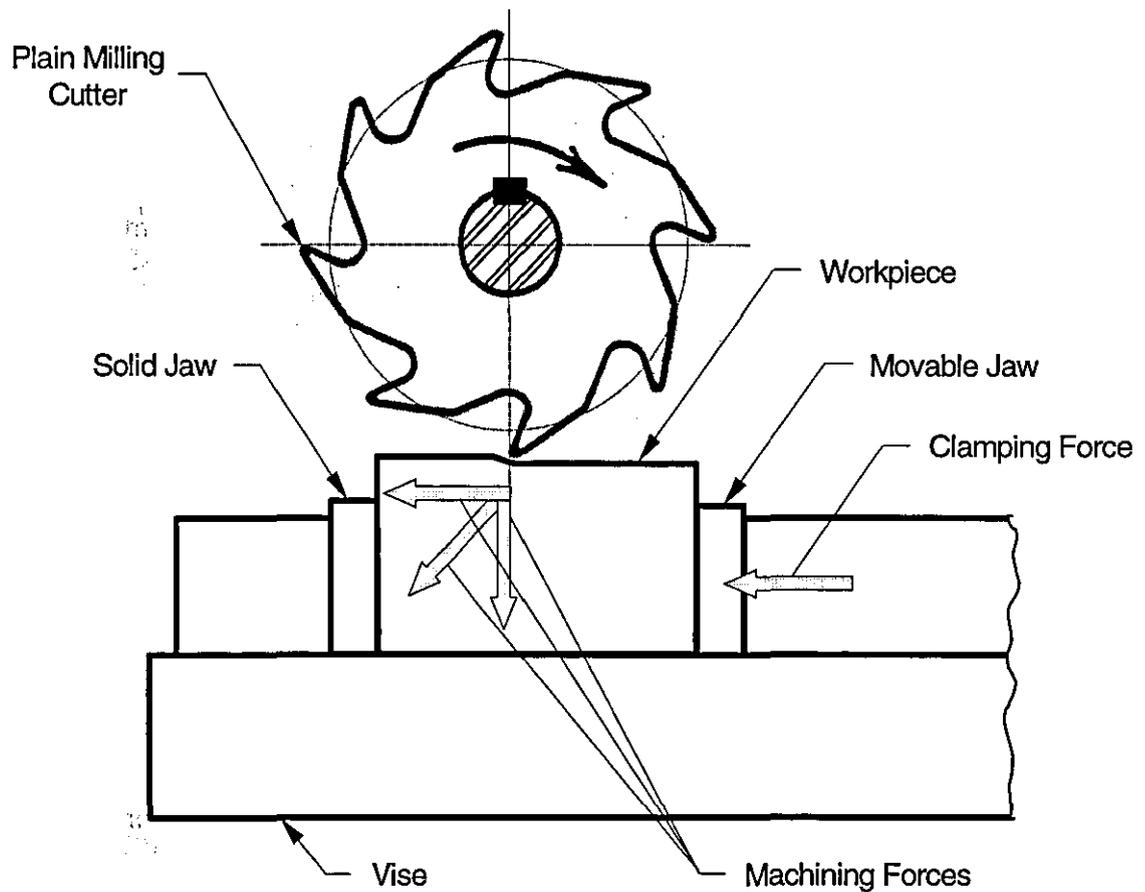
Cutting Forces in a Milling Machine Operation
